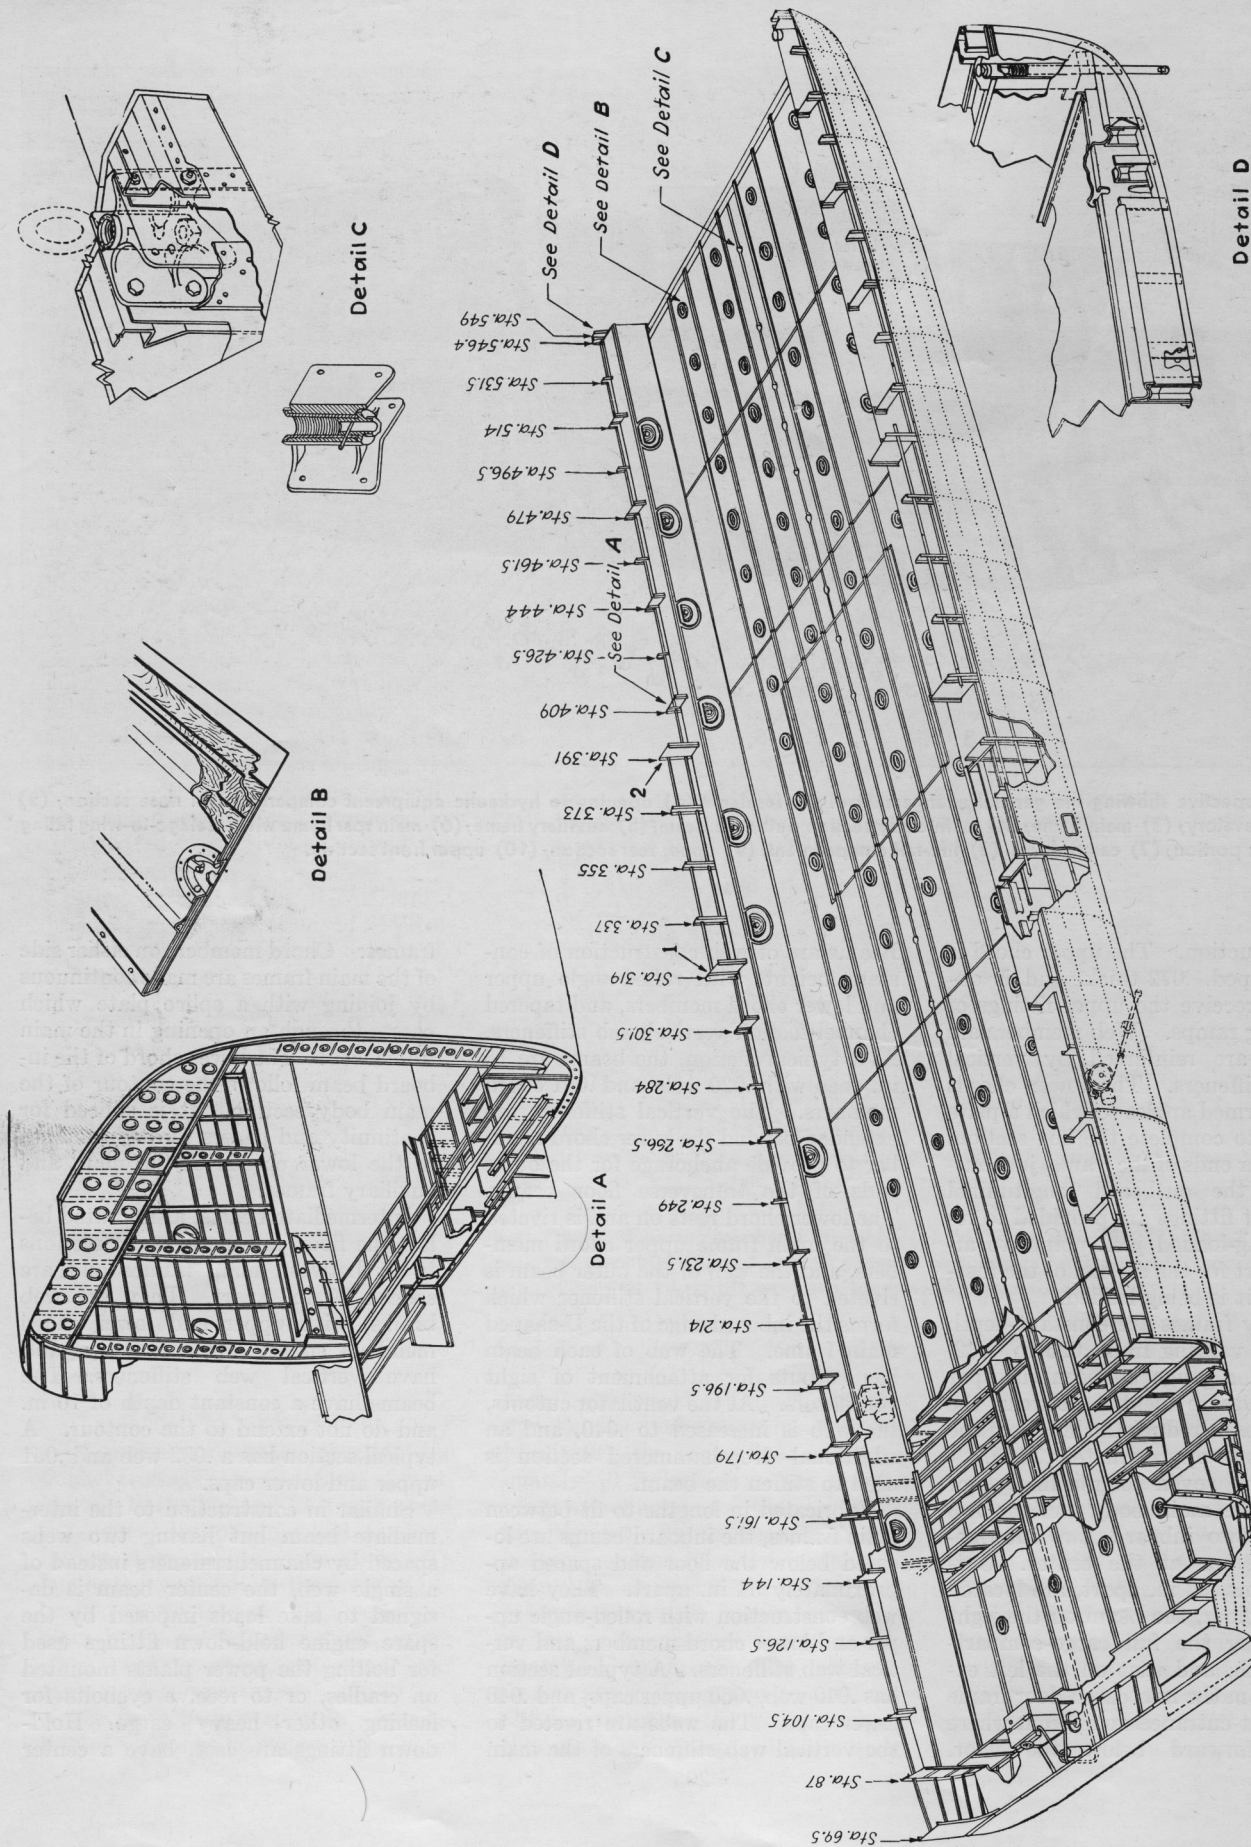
Main body section of the fuselage. Main spar frames are seen at (1) and (2) with aerial delivery door between them in the cargo floor. The detail views are: (a) typical floor section; (b) portion of metal-covered plywood floor showing cargo tie-down fitting and corrugations backed with maple filler strip; (c) center beam engine tie-down fitting shown with removable eyebolt (dotted) and also in cross section; (d) double-web and main frame having trough-shaped upper chord to receive the loading ramp fitting. At the outer end is seen a spring-loaded jack point for support of the fuselage aft end during loading.
